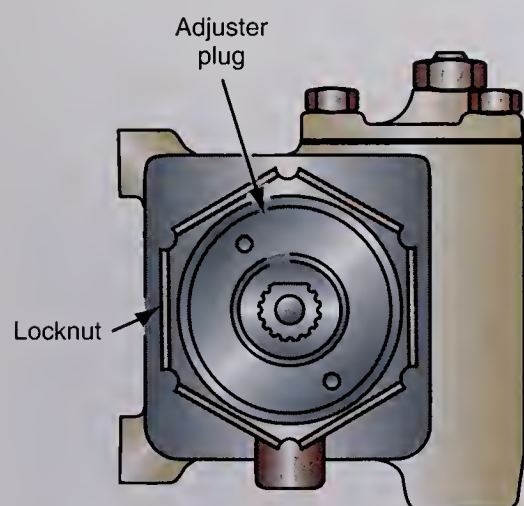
Removing worm shaft thrust bearing adjuster plug locknut.
